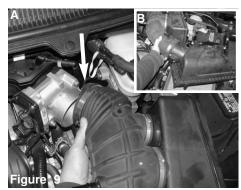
Figure A: Detach the air duct from the throttle body. FigureB: Now remove the entire upper portion of the air box assembly
